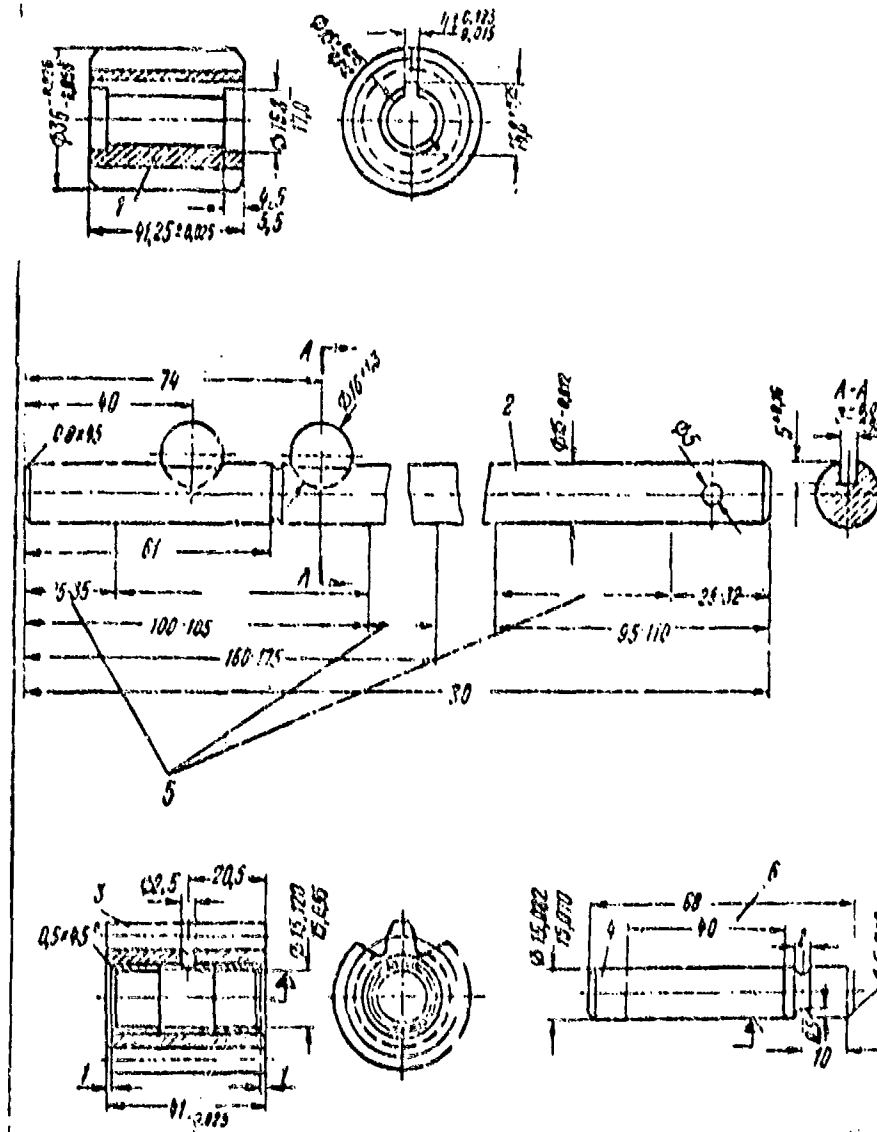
Dimensions of oil pump parts: 1) driven gear 2) drive shaft 3) drive gear 4) driven gear shaft 5) areas of shaft heating 6) area of drive gear shaft heating
